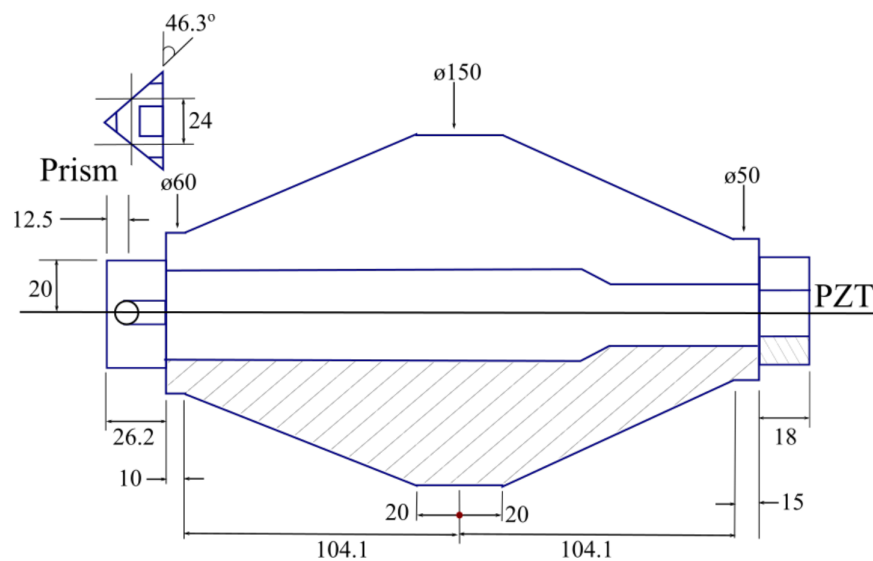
Mechanical design of the mode cleaner optical cavity. Units are in mm.
